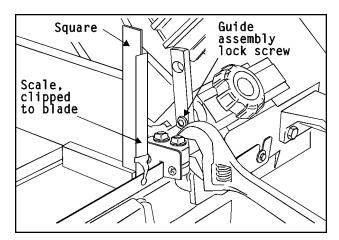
Adjusting the saw blade for vertical. Be sure to do this operation on both of the bearing guide seats so the blade is perfectly vertical along its entire exposed cutting surface.
